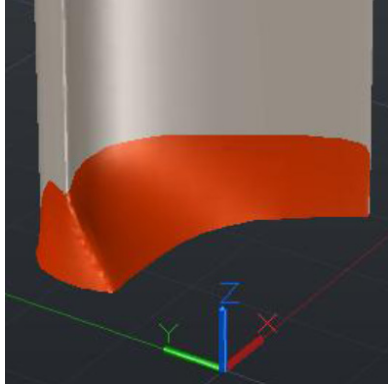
CAD model of the fillet modification used to mimic the L2F-EF airfoil design.
